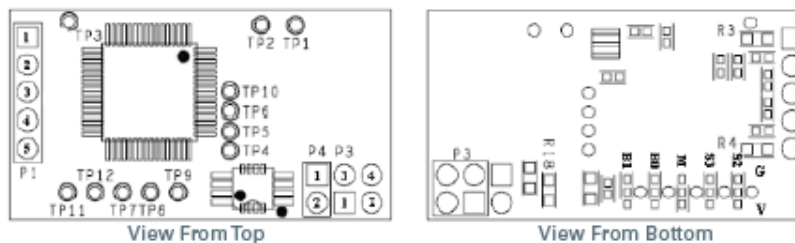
Board Layout Note: Labels in "" Indicated on PCB for convenience
